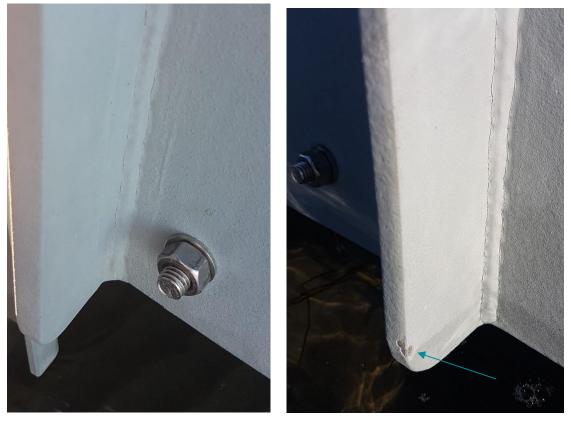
Cracks in the coating along an involute weld seem. It is likely that the cracks penetrate through the first coat but not the coating layer closest to the steel. To the right: A damage in the coating, no corrosion.
